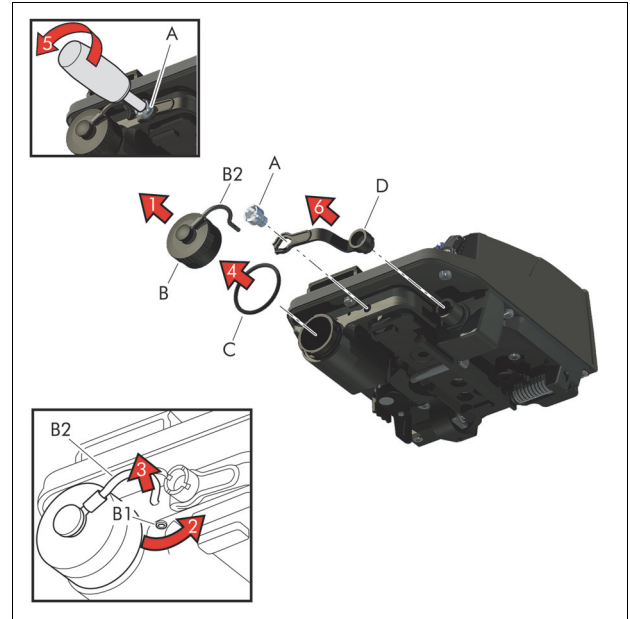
Fig. A.a - Removal of battery cap (B) and protection cap (D)
